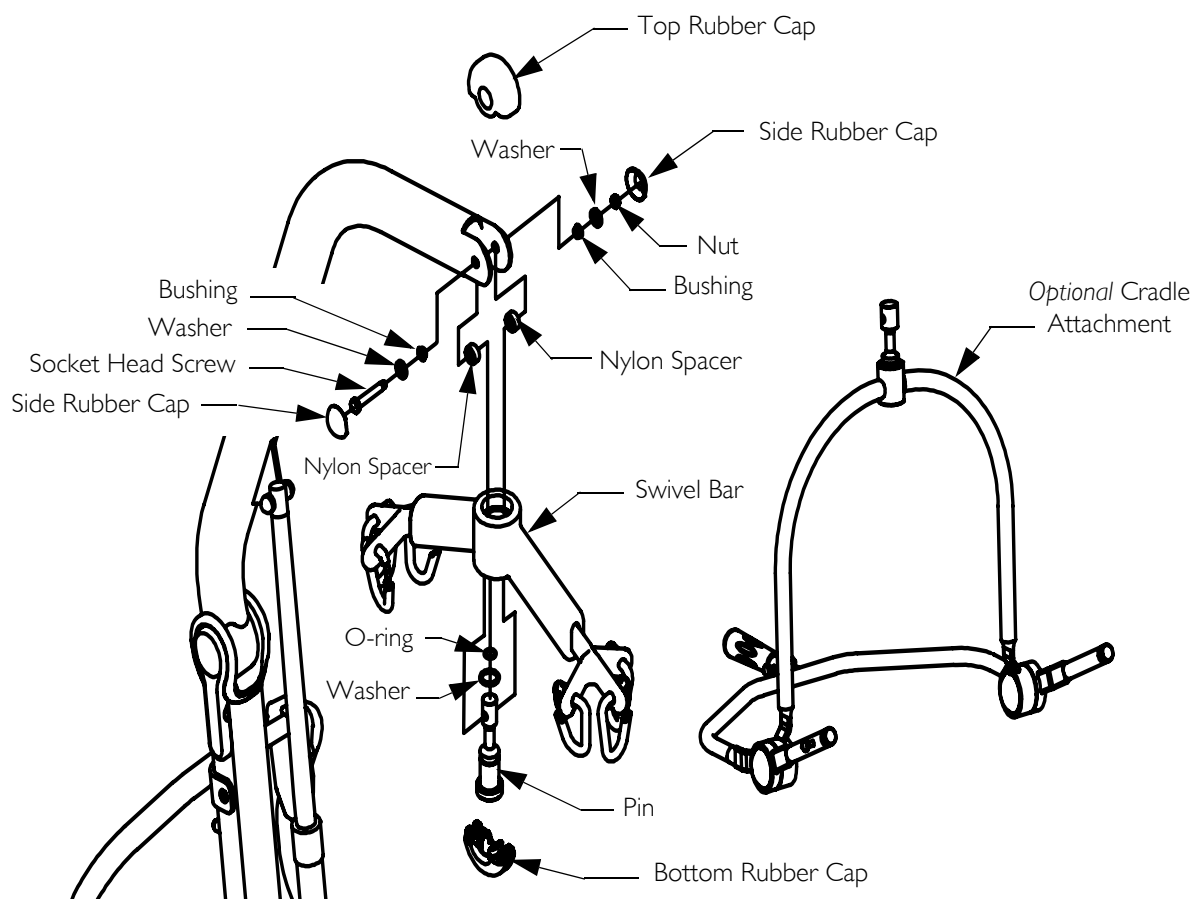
Replacing the Swivel Bar or Optional Cradle Attachment
